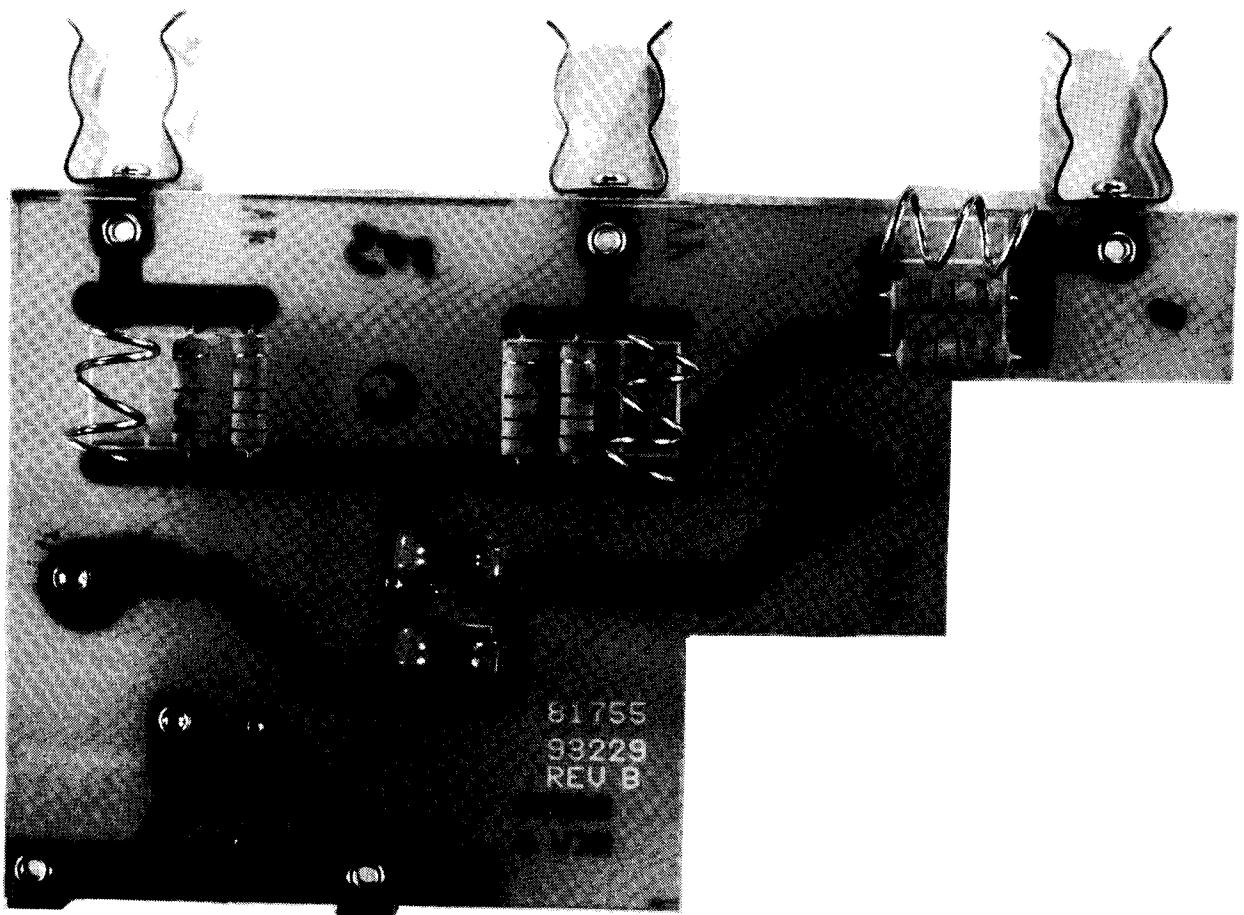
22 PLATE CONNECTOR BOARD (81755)
